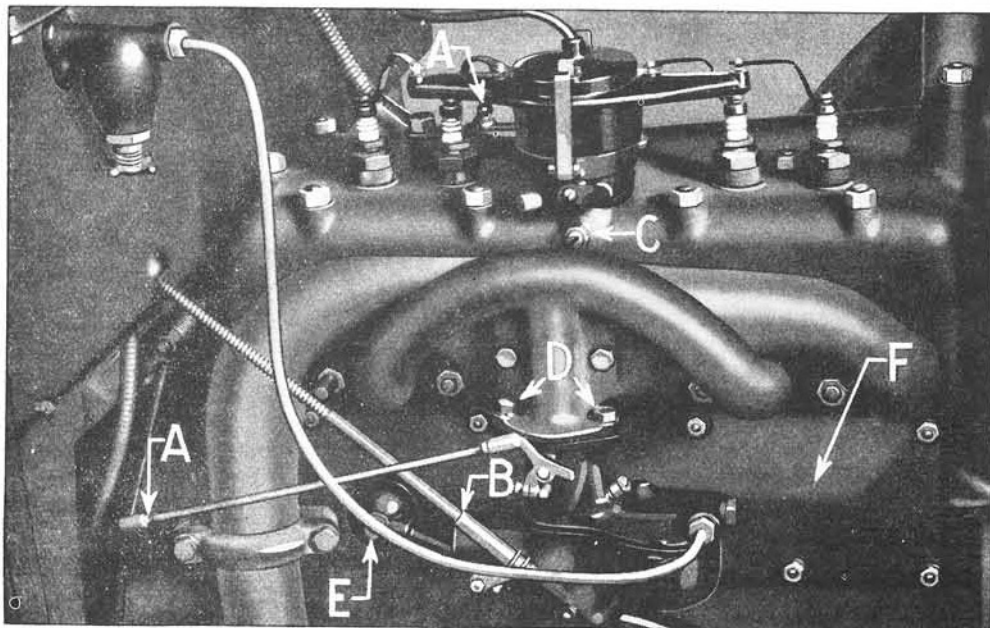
A. Disconnecting and removing parts of engine preparatory to grinding valves and removing carbon.
